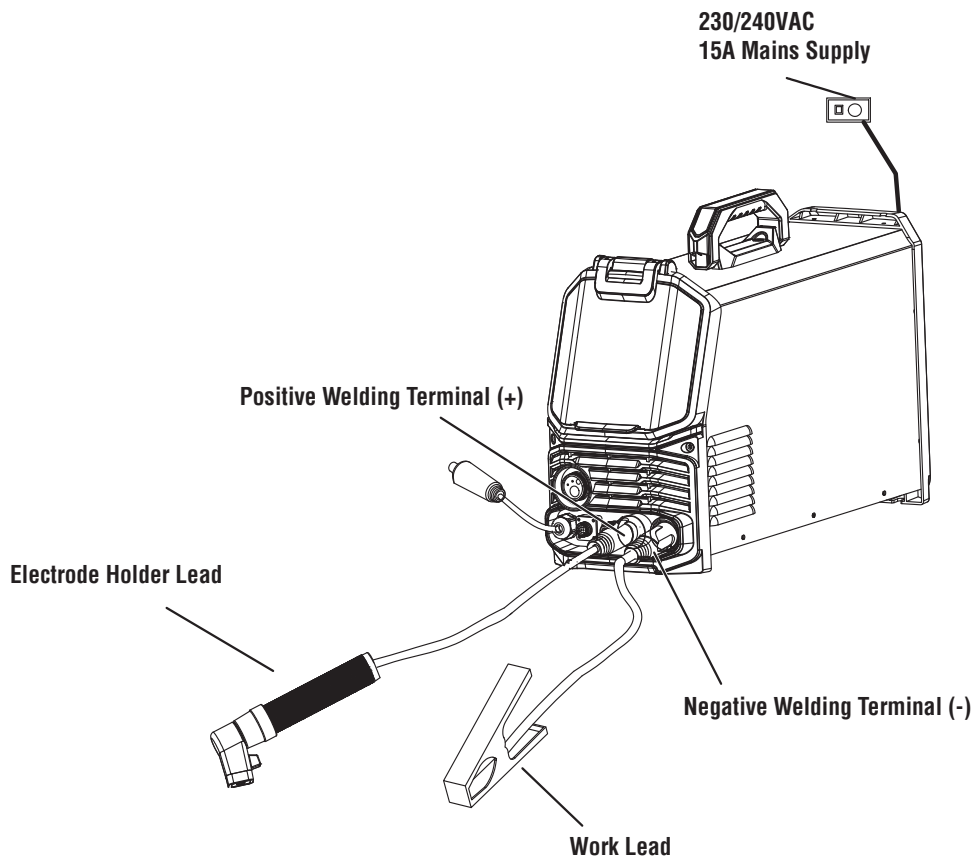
Setup For STICK (MMAW) Welding
